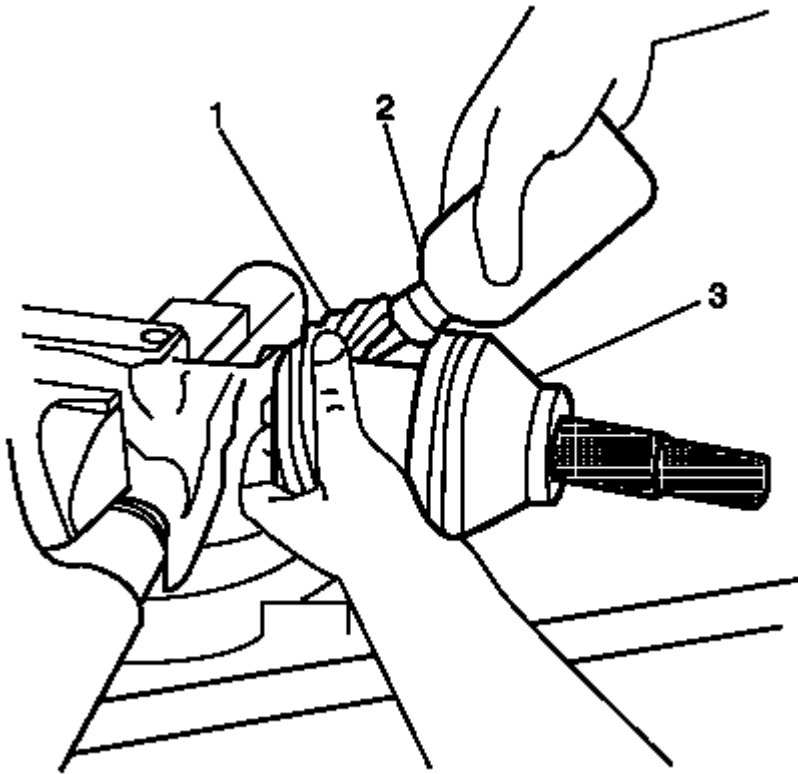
Placing Lubricant Inside Outer Joint Boot
